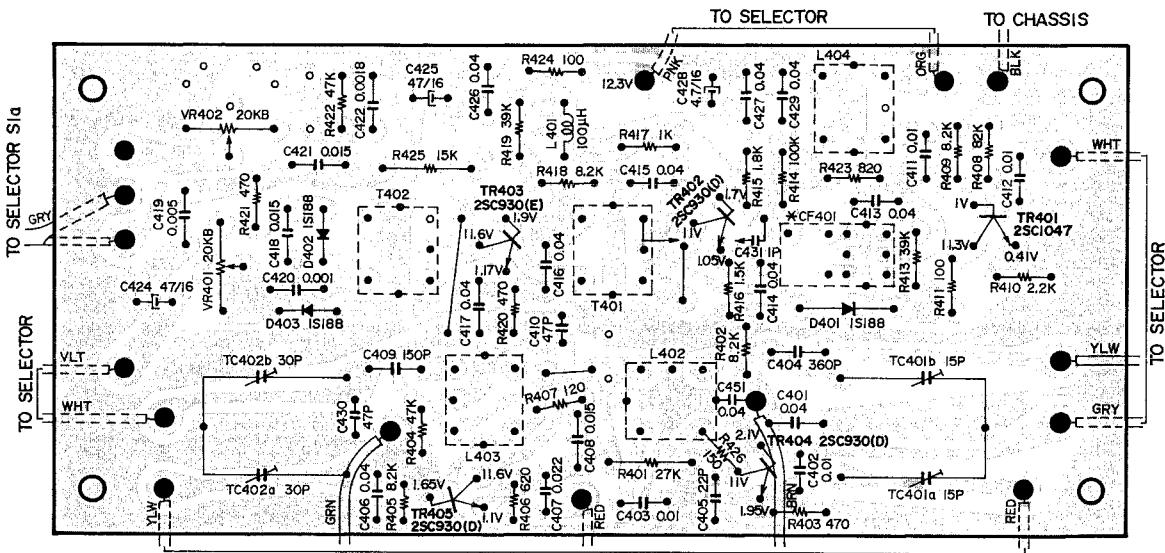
AM IF AMP. P.C. BOARD 4013 (Reverse Side)
